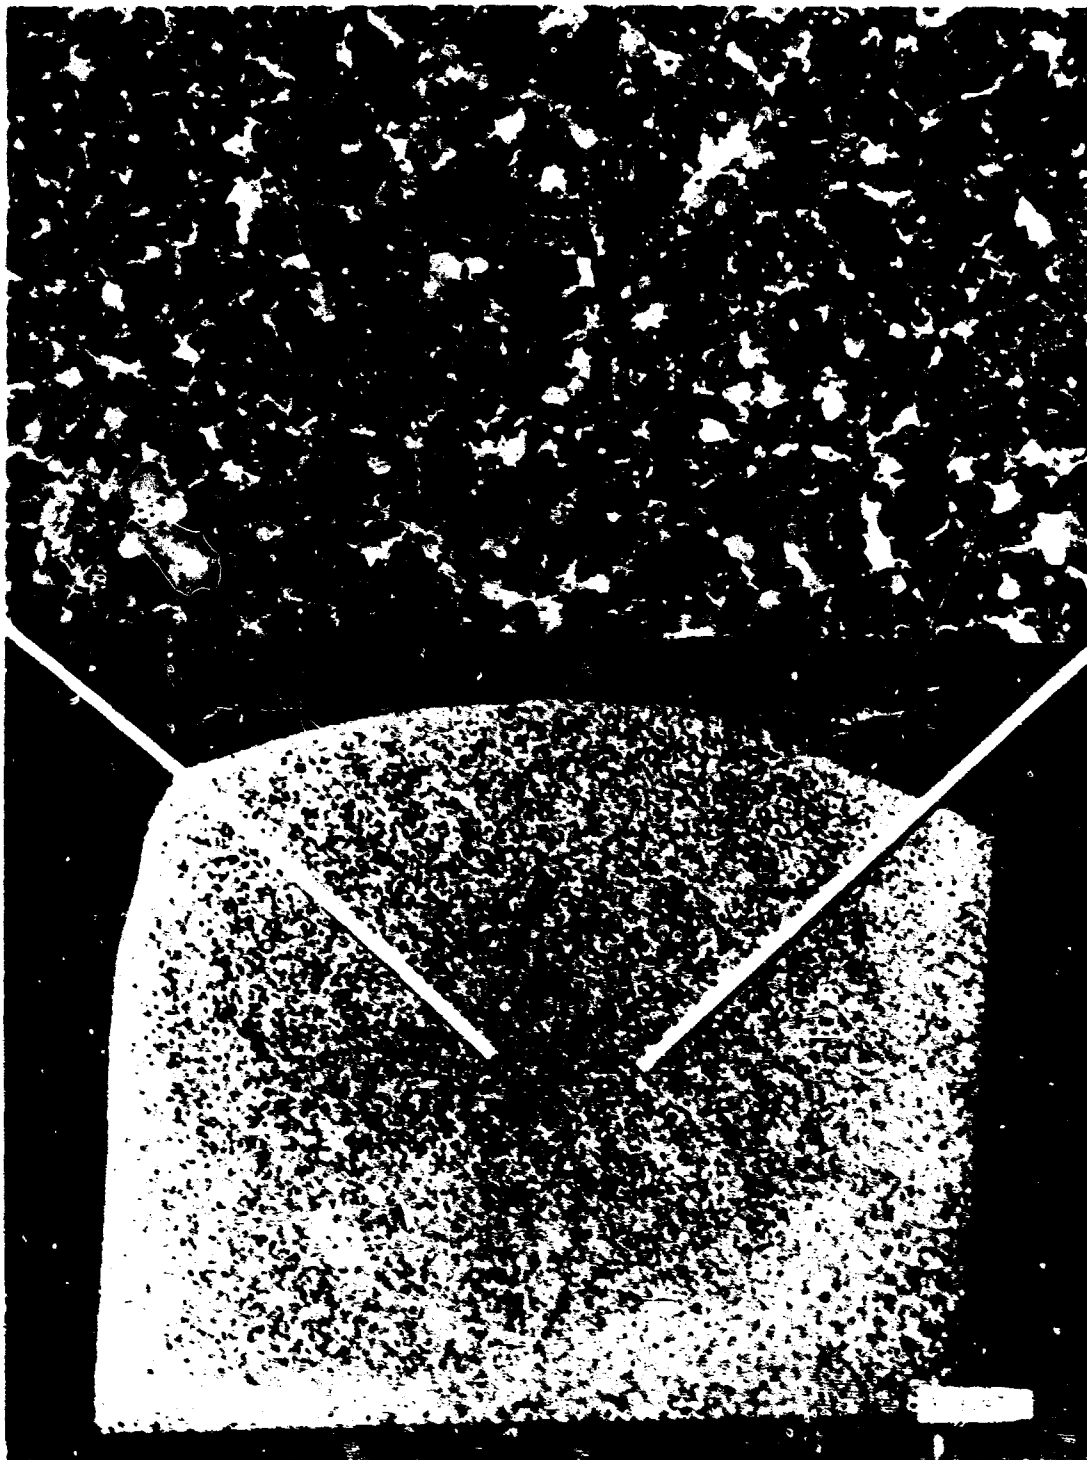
SECTIONED INSERT OF ROCKET MOTOR TEST NO. 13
